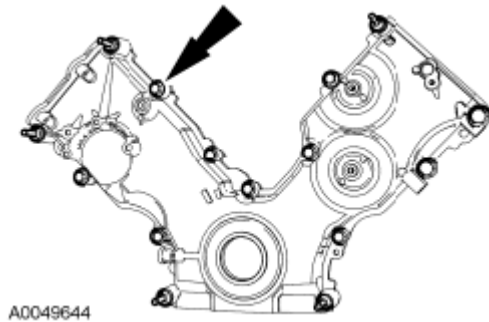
Identifying Engine Front Cover Bolts And Studs
